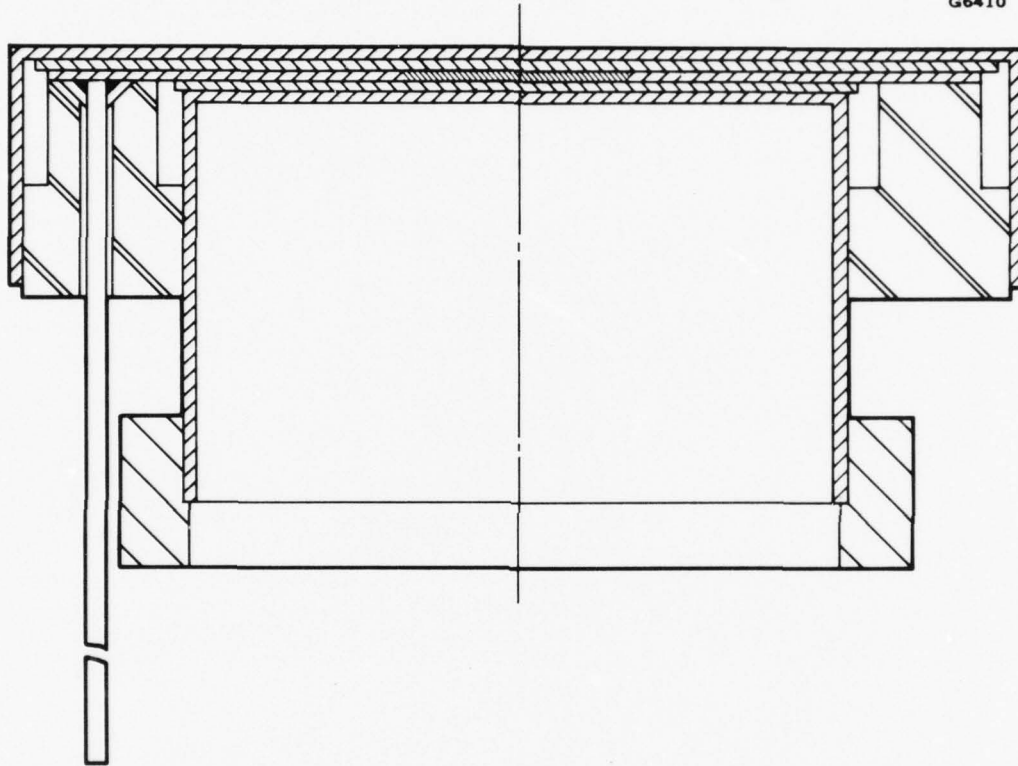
SANDWICH GRID ASSEMBLY AS BRAZED
